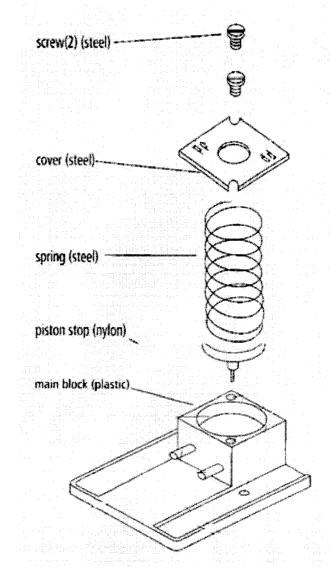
Pneumatic piston sub-assembly (Before DFA), [Boothroyd and Dewhurst, 1987]
